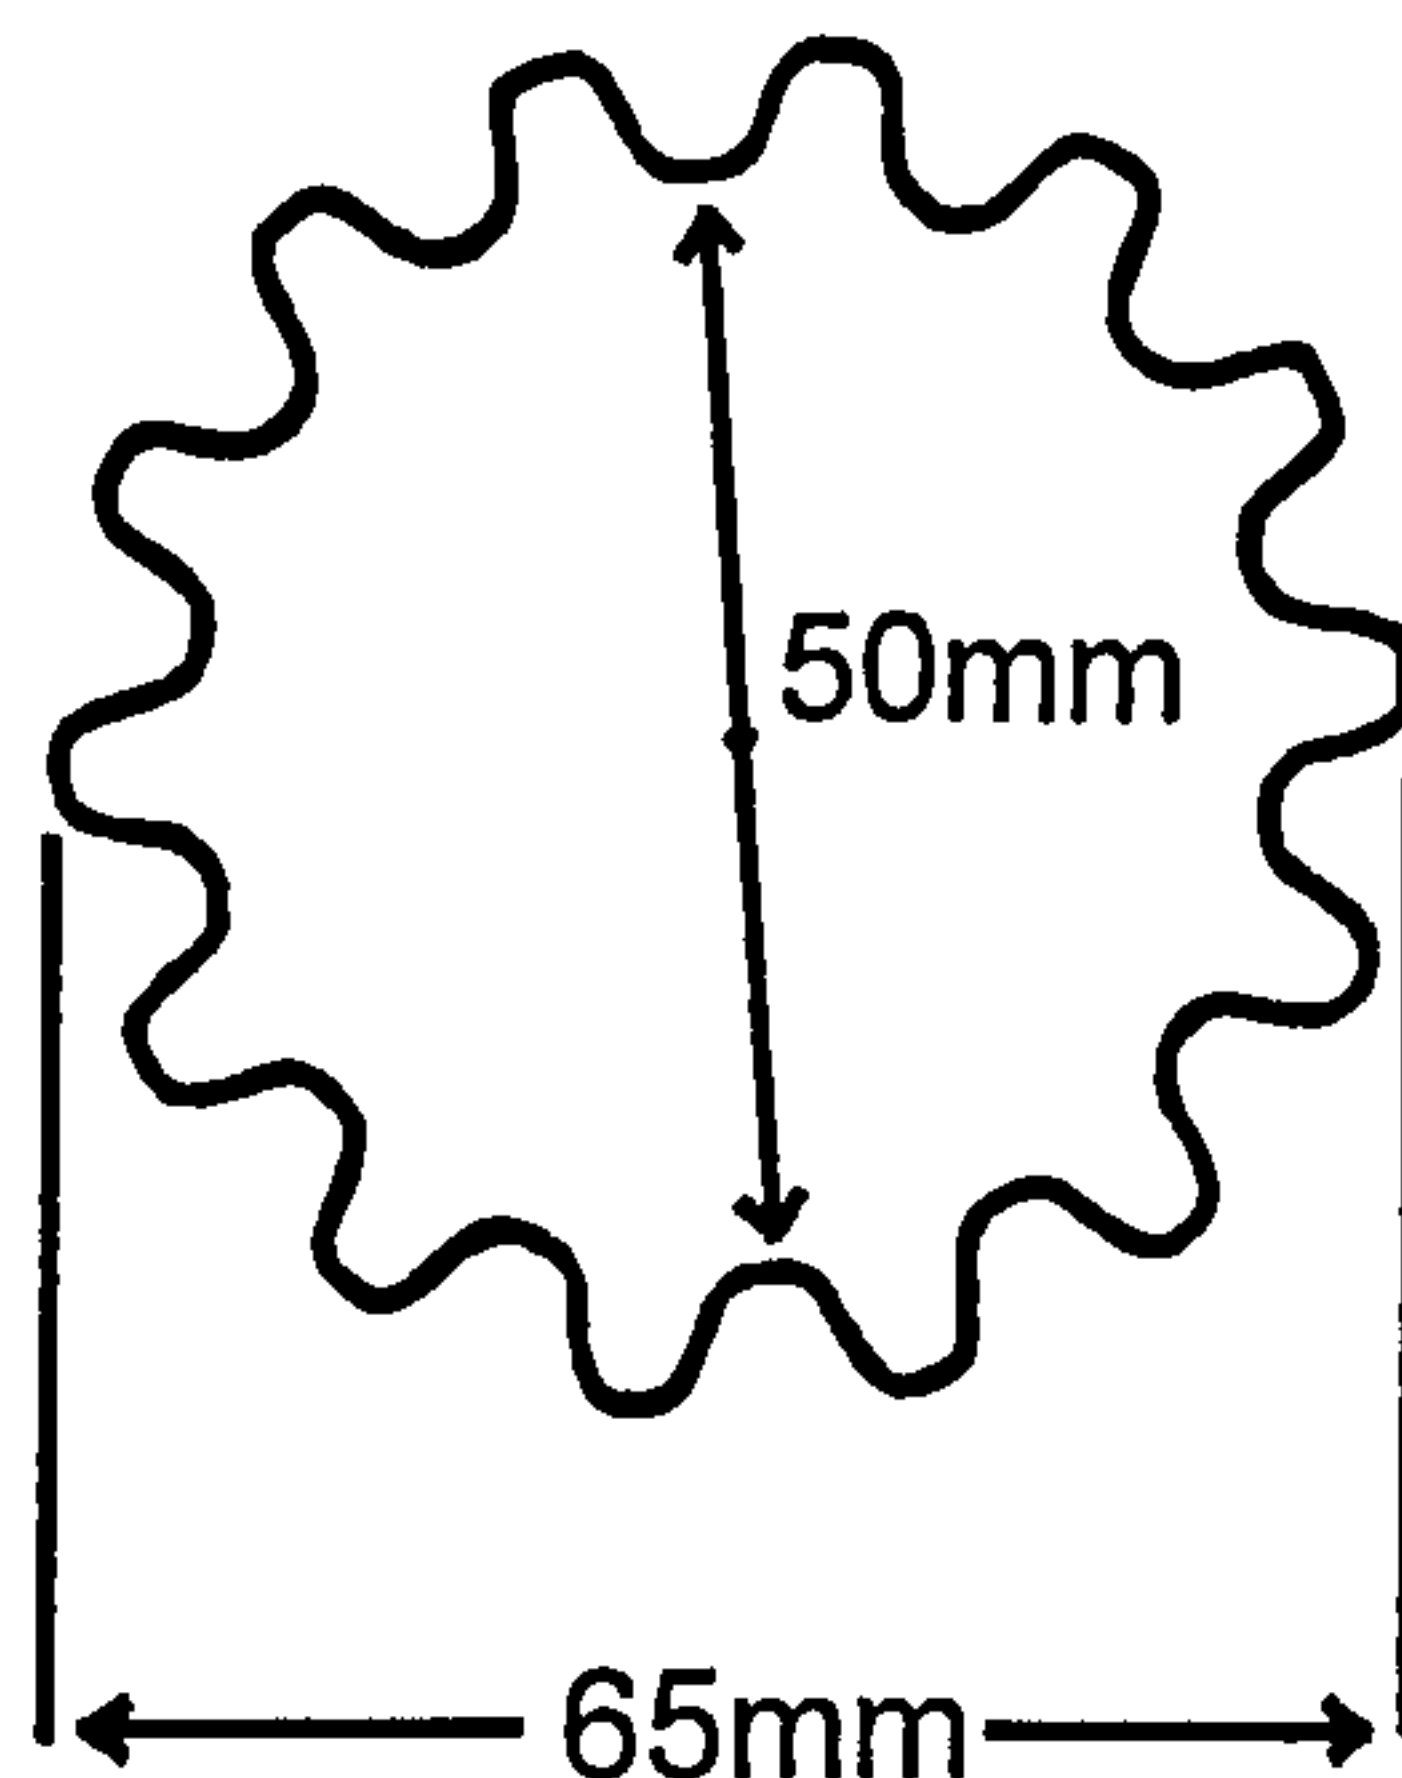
Mould cavity geometry plan view (The sprue is located at the centre)
